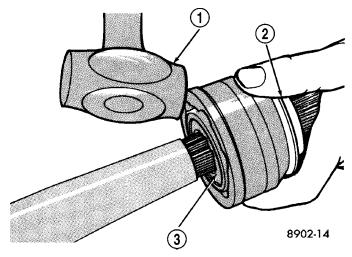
Outer C/V Joint Removal from Interconnecting Shaft
